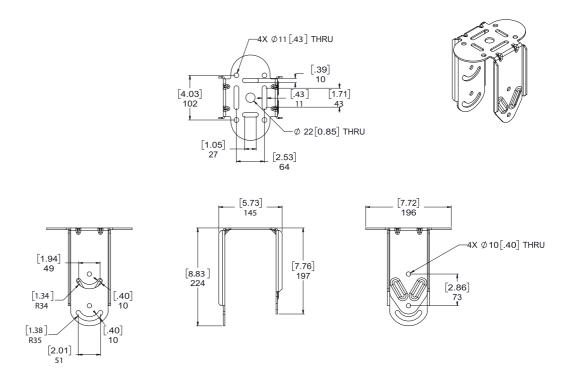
MMA-1090 Yoke [Inches] Millimeters
